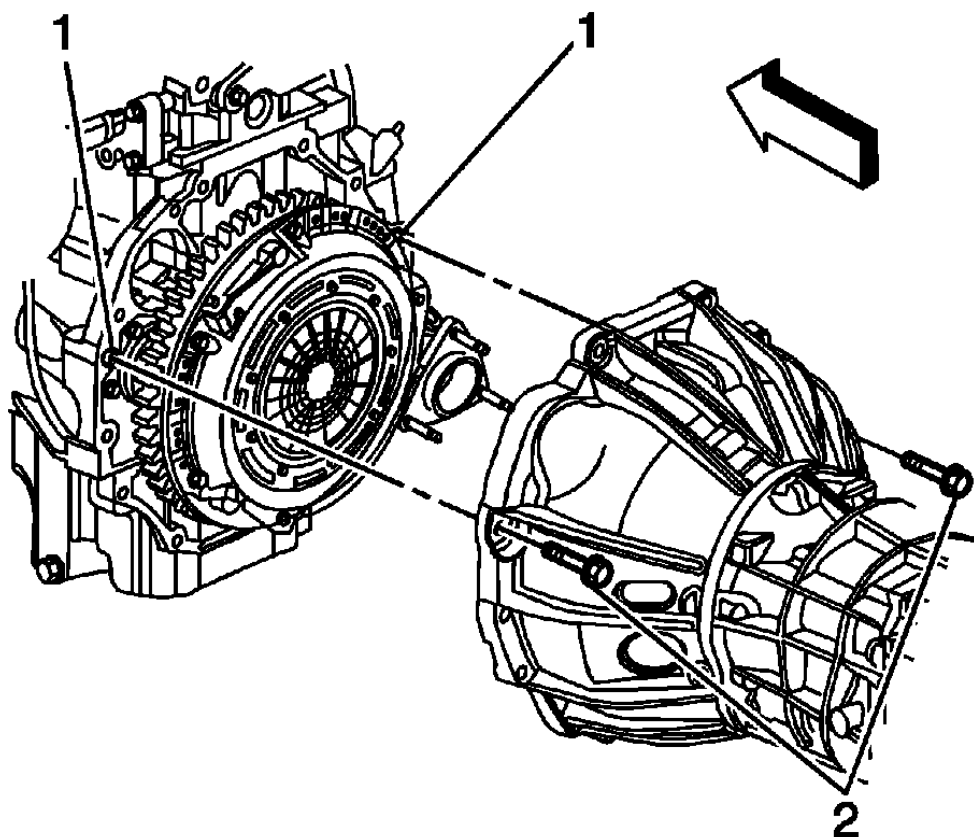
View Of Transmission Mounting Bolts & Engine Dowels
